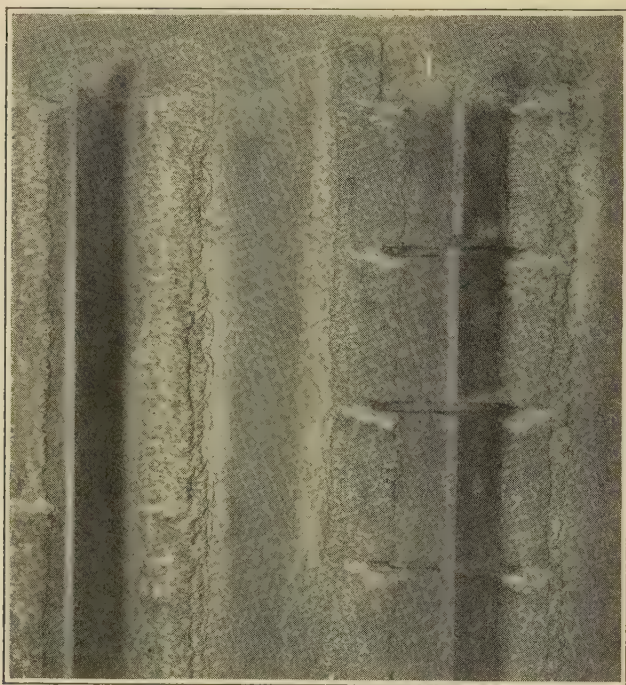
Test No. 3, after completion of welding and before test to destruction.
